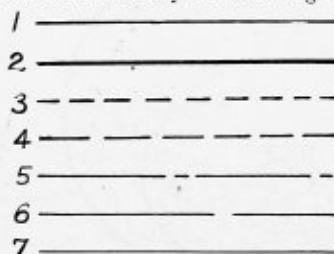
The Seven Kinds of Lines Used in Making Mechanical Drawings
